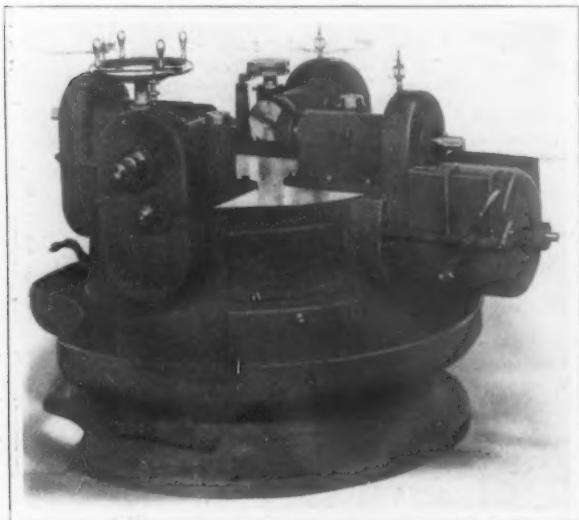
The Four-Way Drilling Machine Built by the Reed-Prentice Company for the Ford Motor Company for Drilling Universal Joint Rings
